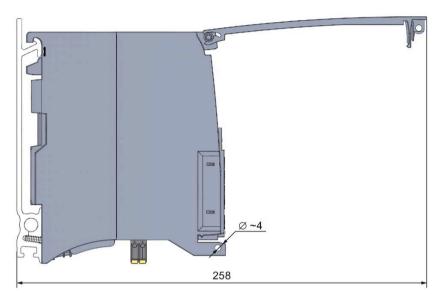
Dimensional drawing of CPU 1511-1 PN, side view with front panel open
